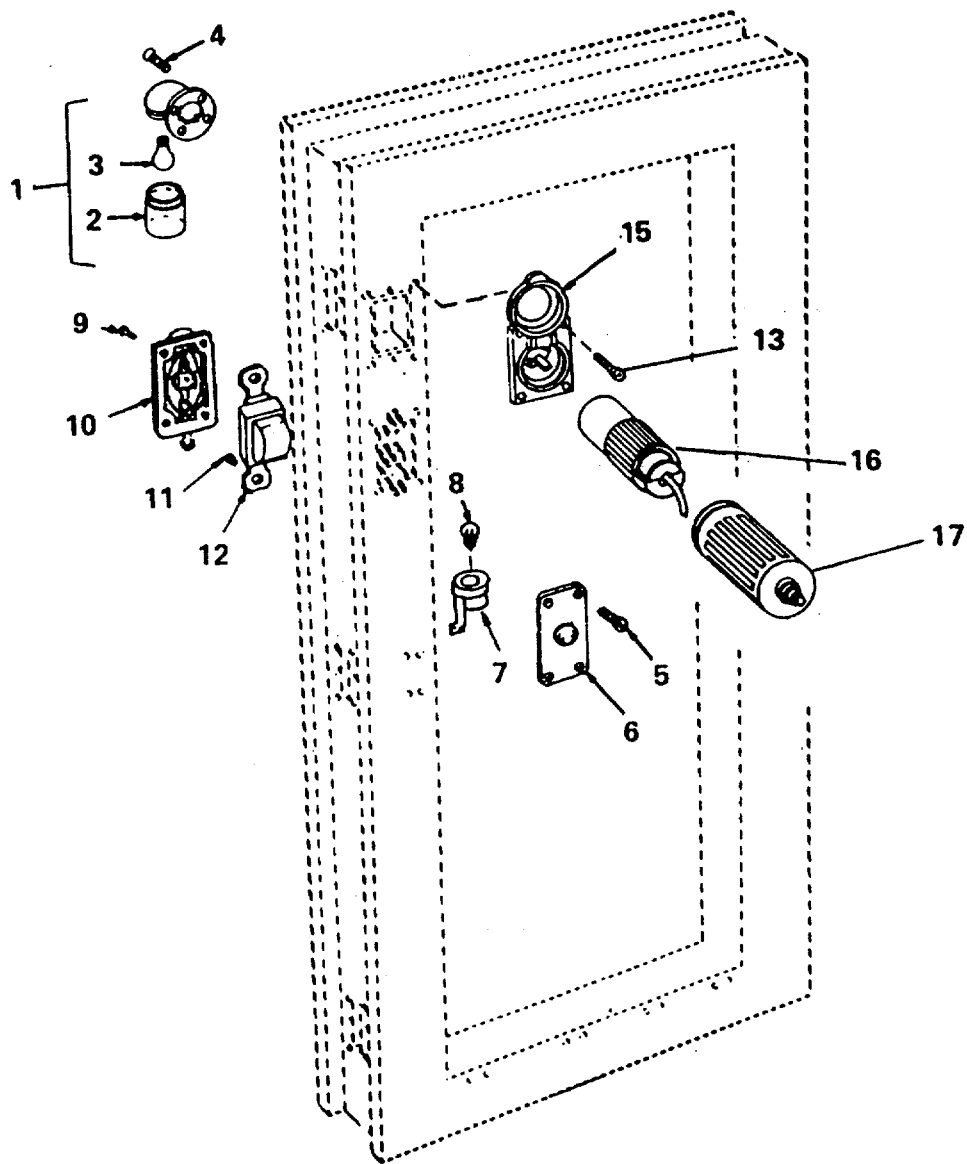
Electrical Components, Panel C (Models AAG00PF, A1200PFA, and AA4000PF) (Sheet 1 of 2)
